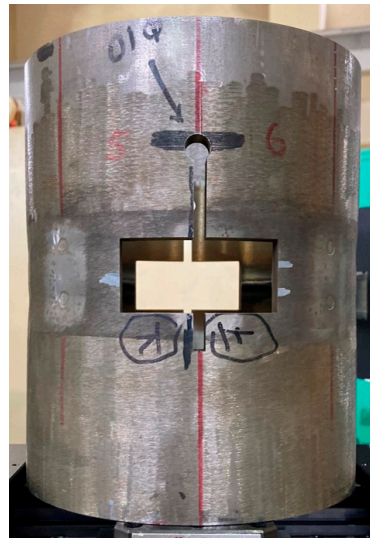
Photograph of the welded pipe test material (view from an angle of 225°).
